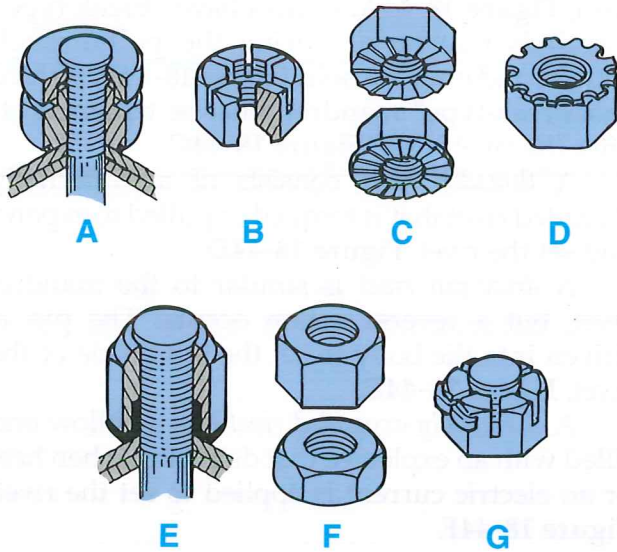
There are many types of free-spinning locknuts. A—Mating type. B—Slotted locknut with recessed bottom. C—Locknut with deformed bearing surface. D—Locknut with lock washer. E—Locknut with insert. F—Jam nut. G—Slotted locknut.
